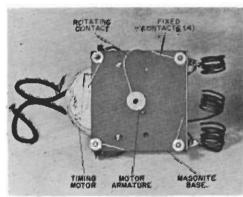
Curve the rotating contact to get a gentle spring-like action. Contact and motor leads should be long enough to allow assembly without stress.
